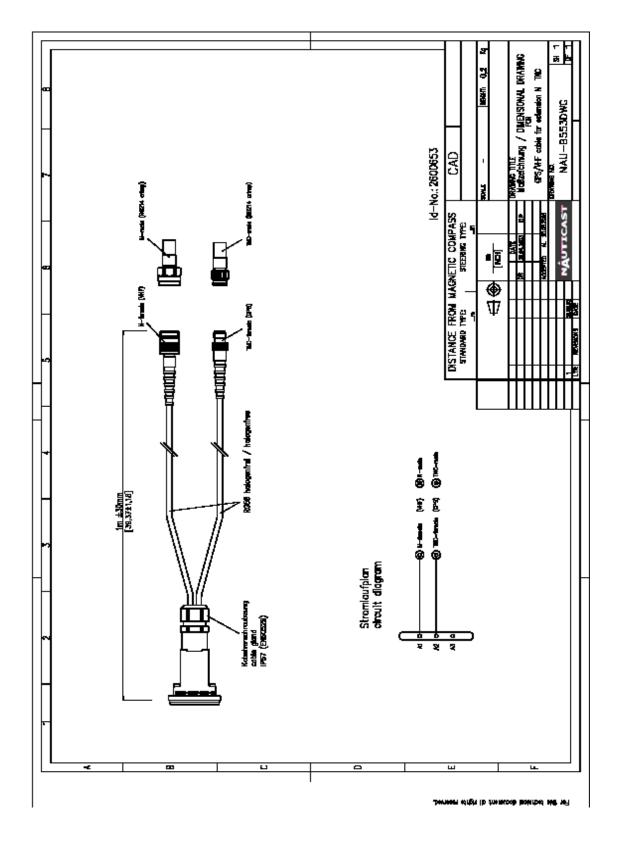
Dimensional Drawing for GPS/VHF Cable
